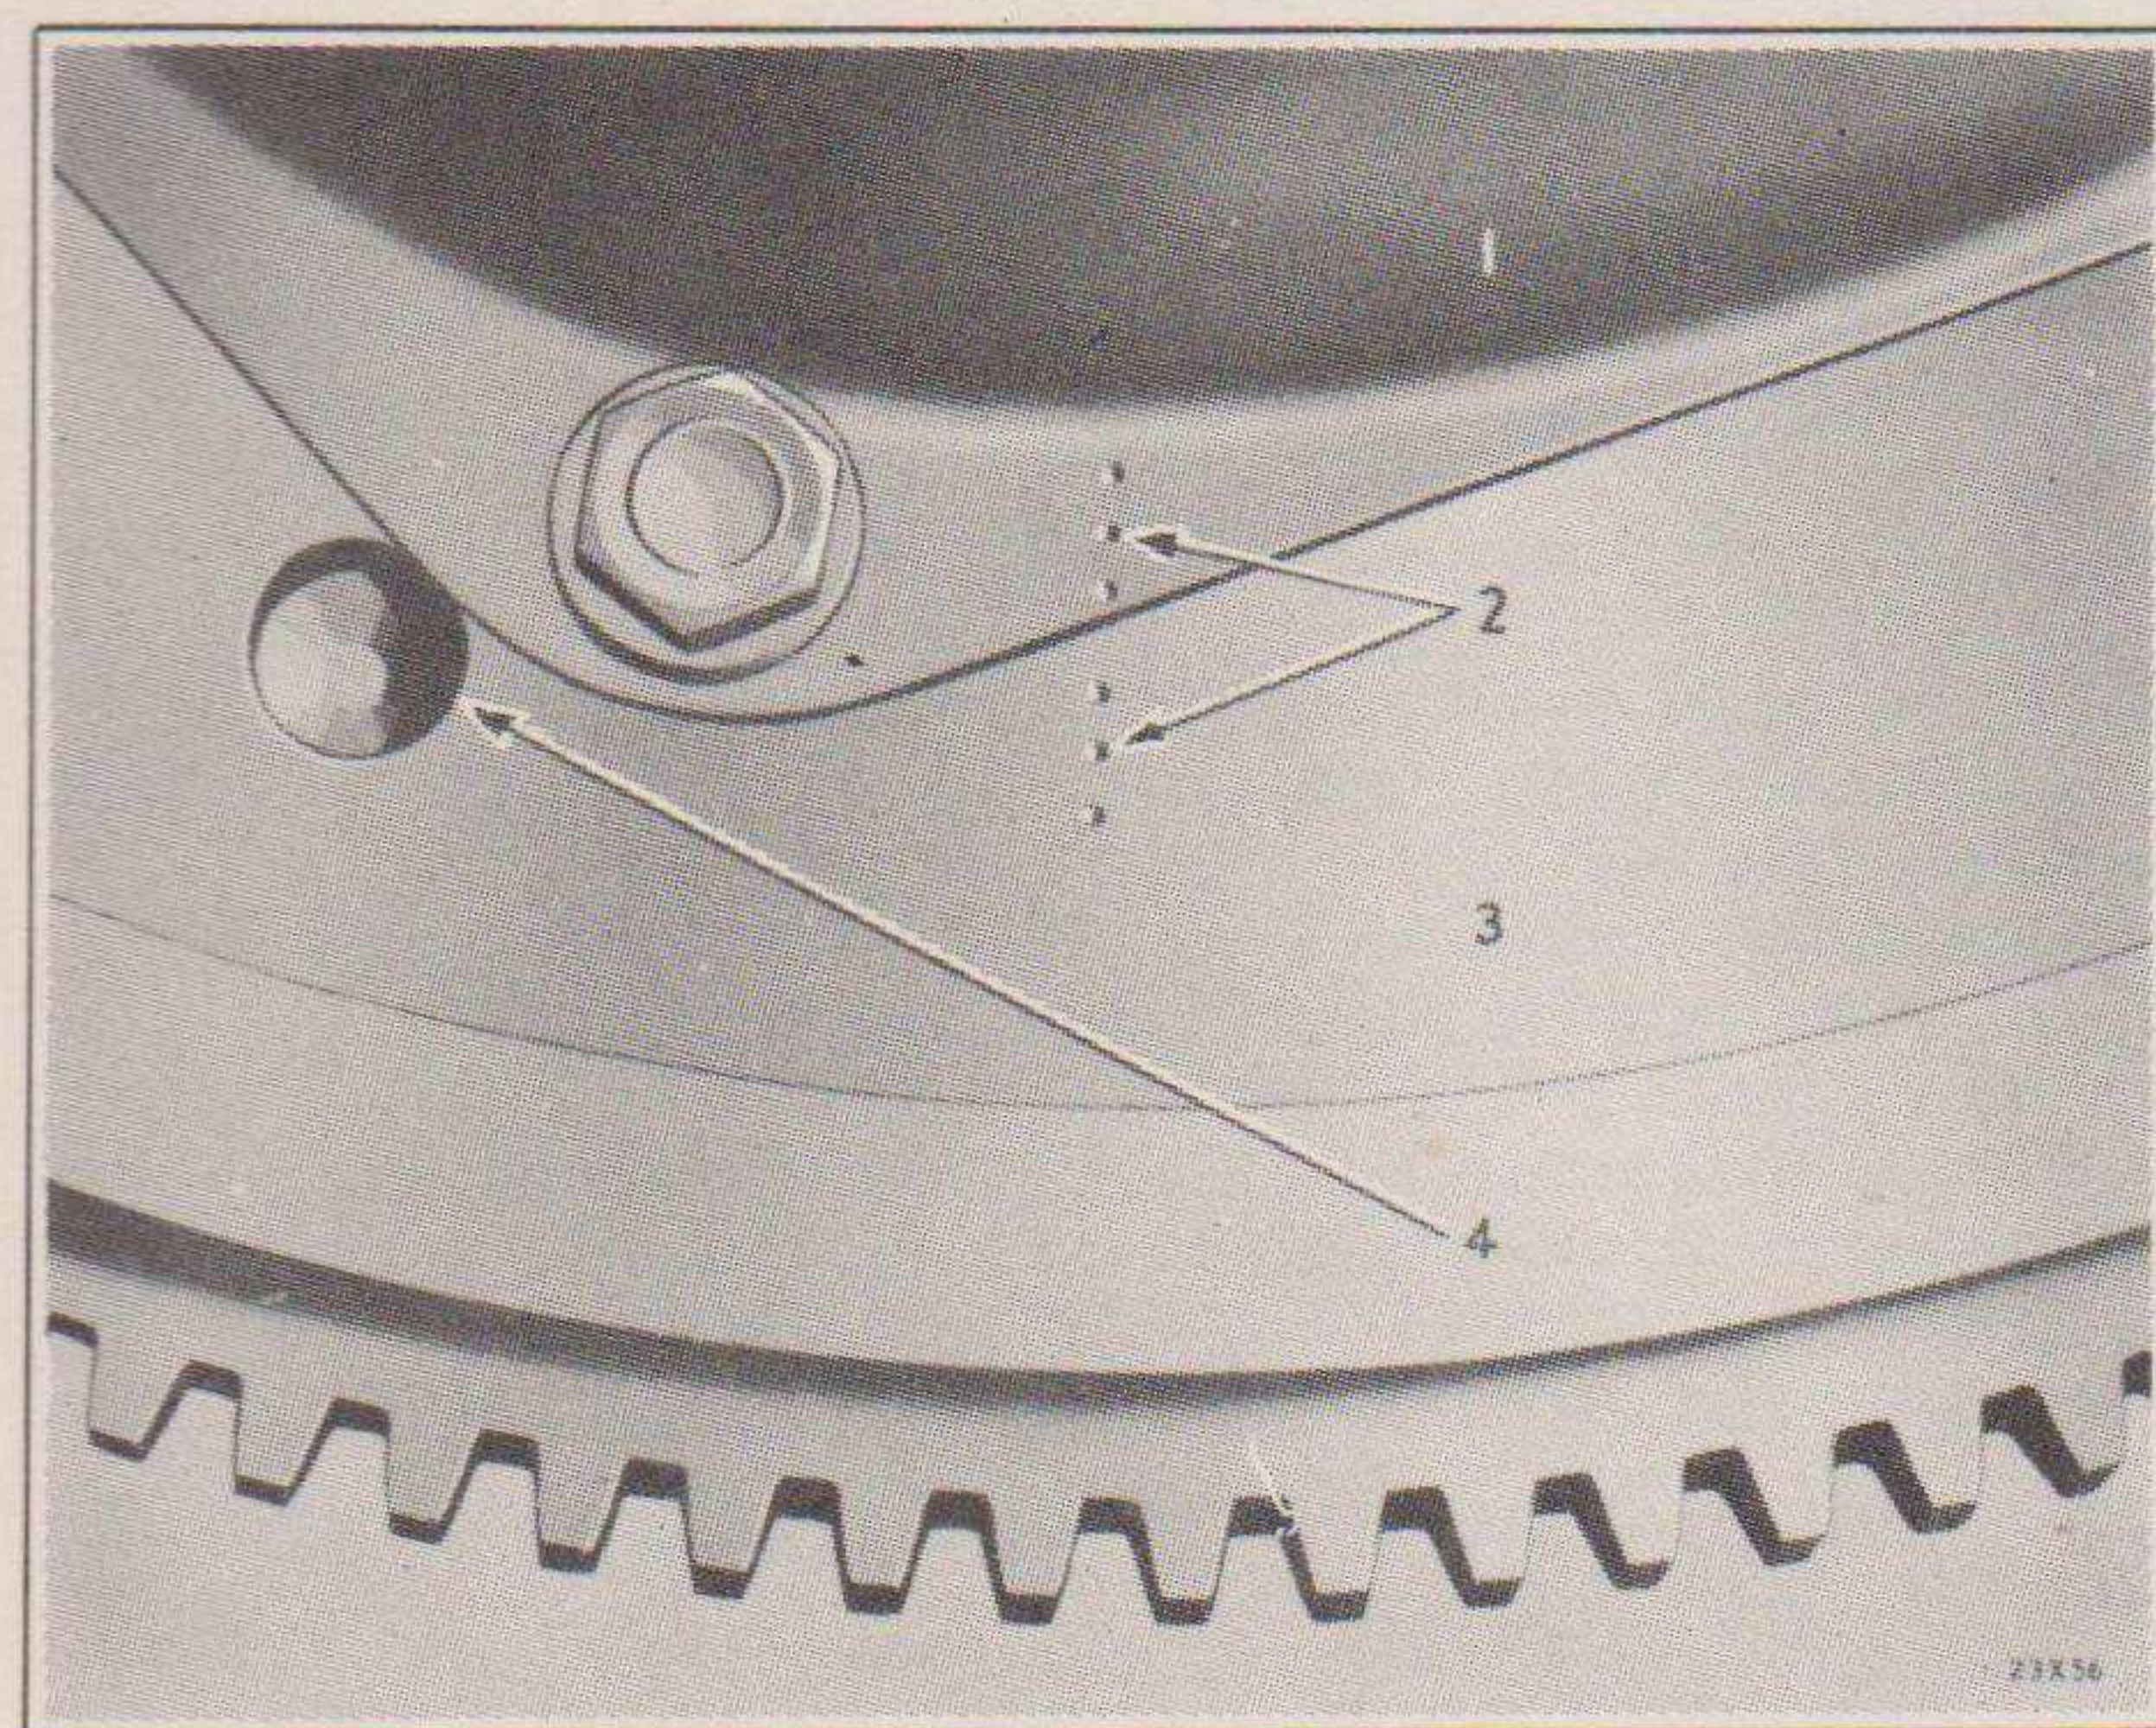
Punch Marks on Clutch Cover and Flywheel
